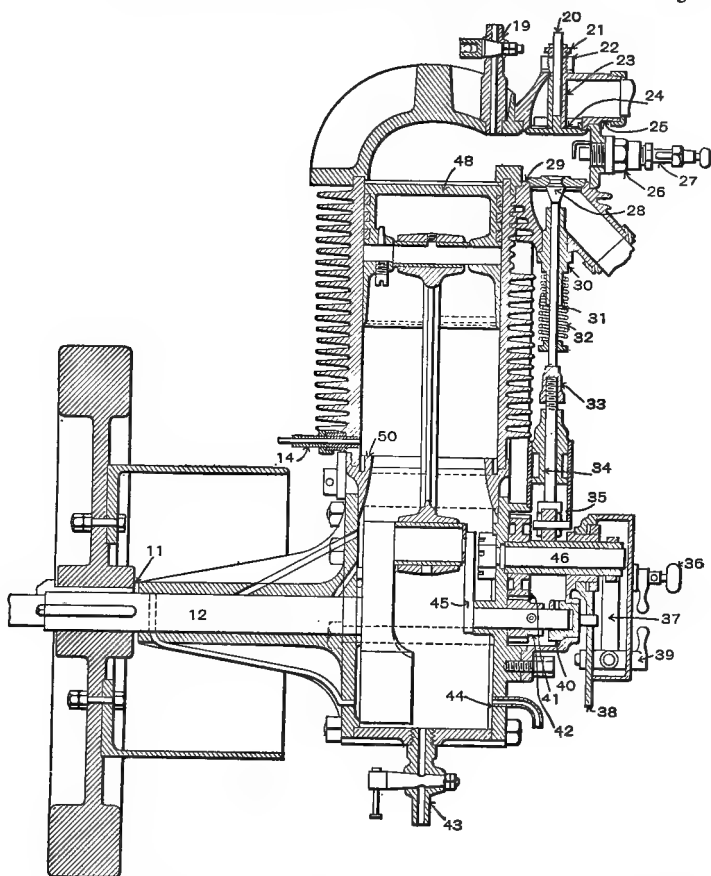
Sectional View of Air Cooled Motor. Figures Denote Following Parts: 12—Crankshaft. 14—Oil Pipe. 19—Petcock for Compression Release. 20—Valve Spring Key. 21—Valve Washer. 22—Inlet Valve Spring. 23—Inlet Valve Guide. 24—Intake Valve. 25—Valve Cage. 26—Sparkplug. 27—Sparkplug Porcelain. 28—Exhaust Valve. 29—Exhaust Valve Seat. 30—Exhaust Valve Guide. 31—Exhaust Valve Stem. 32—Exhaust Spring. 34—Exhaust Operating Rod. 35—Cam Roller. 36—Timer Cover Screw. 37—Contact Spring. 38—Timer Advance Lever. 41—Timing Pinion. 42—Cam Gear. 43—Drain Cock. 44—Pipe Regulating Oil Level. 45—Gear Operating Shaft. 46—Camshaft for Exhaust. 48—Piston. 50—Oil Groove.
